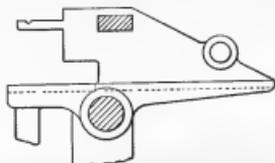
Grantype; mould-end jaw. Scale: half size.
